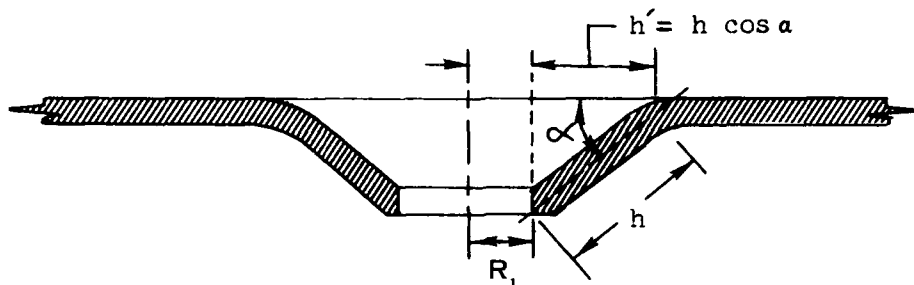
DIMPLE SHOWING FLANGE LENGTHENING
